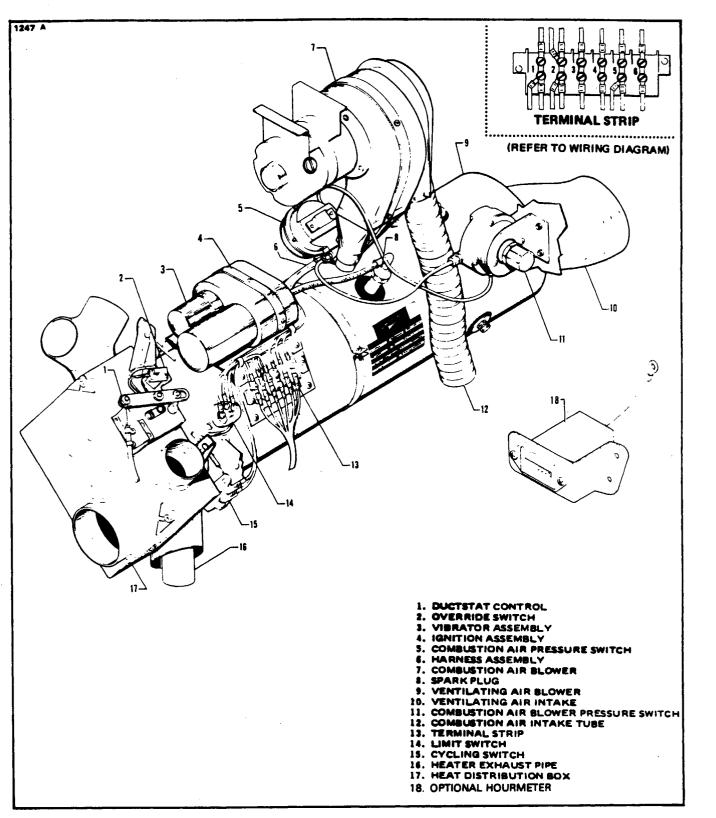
B39D59, D39D59 Heater Assembly and Combustion Air Blower
